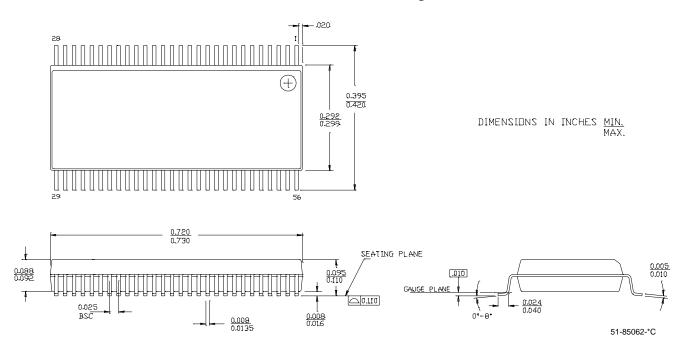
56-lead Shrunk Small Outline Package O56
